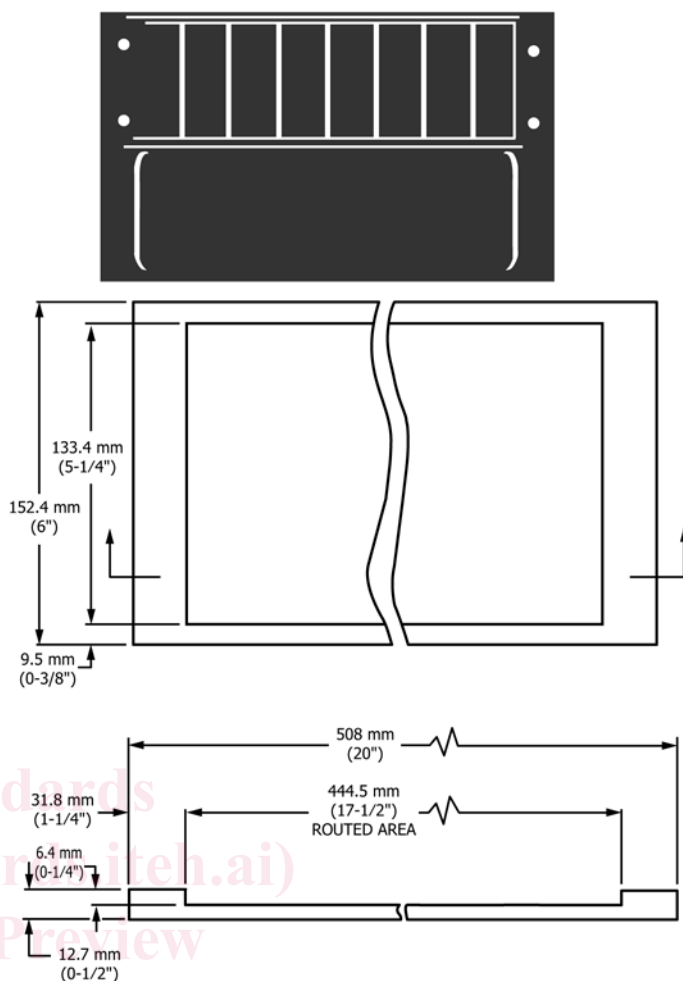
Routed Specimen Mounting Board Showing Placement of Specimens
